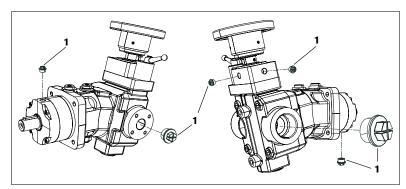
Remove the transport protection, A7VK open design, clockwise rotation
